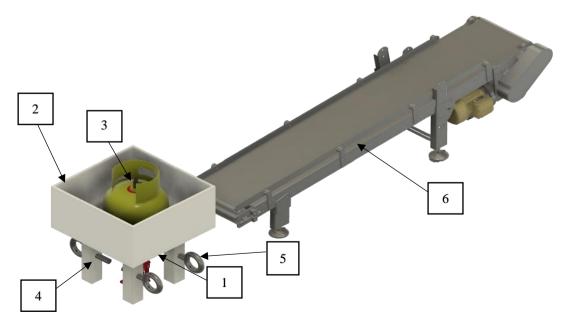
Prototype of Leak Detection Tool for Liquefied Petroleum Gas Cylinders
